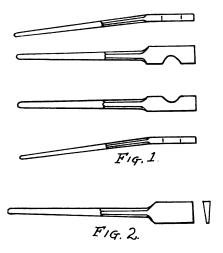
SHOWS THE STYLE OF CUT-TERS FOR COLD WORK; FIG. 2 THE KIND FOR HOT WORK
